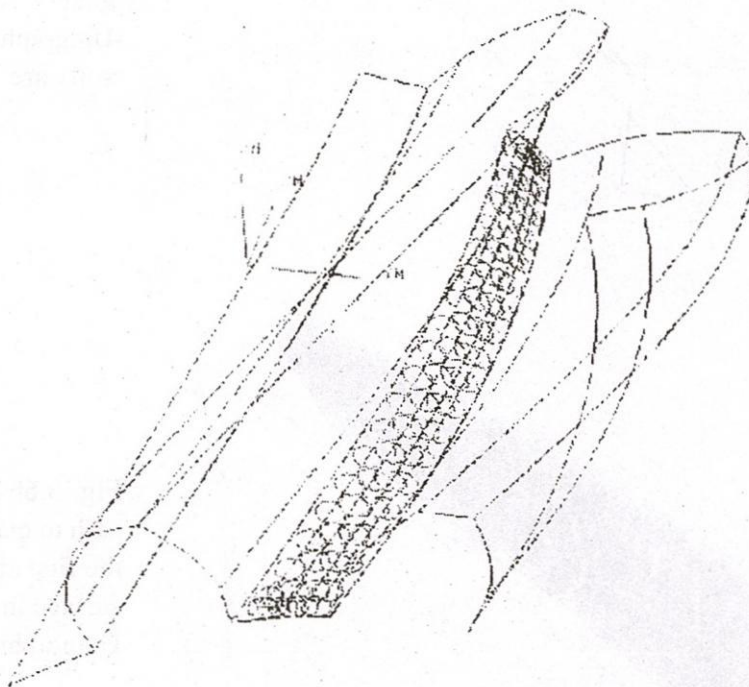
Tool path to machine the dedendum surface in Unigraphics II software
